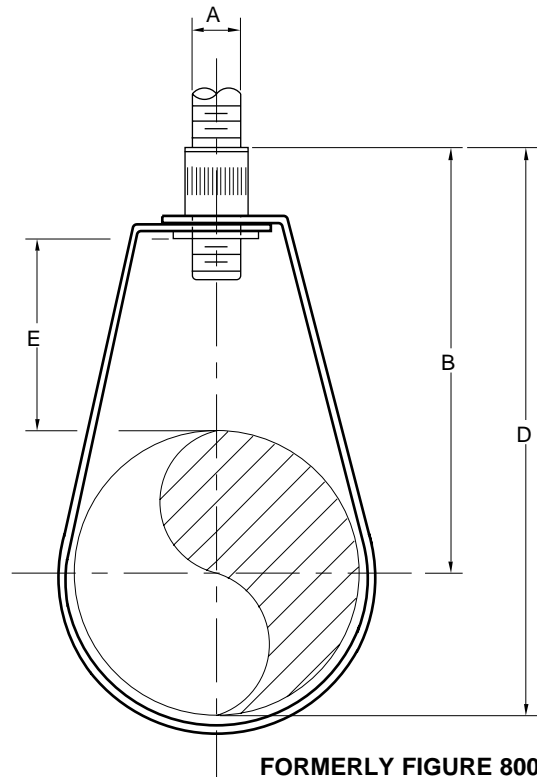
FP – NFPA ADJUSTABLE SWIVEL RING
